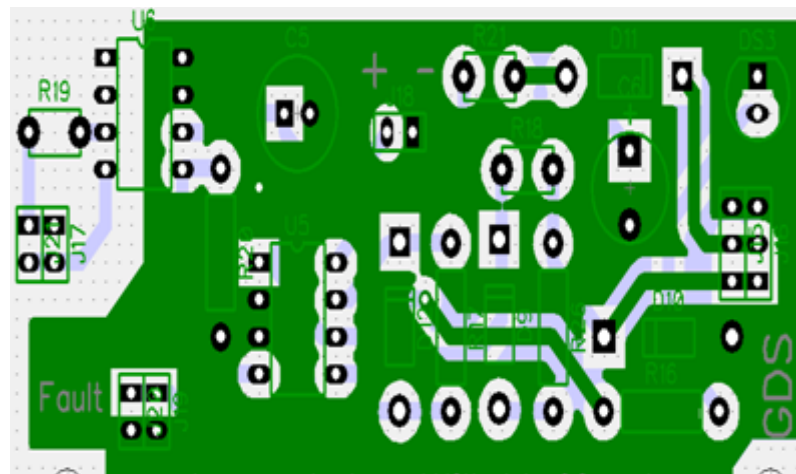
PCB layout of the MC33153 gate driver circuit
